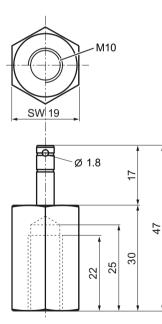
Dimension drawing of quick change holder 6GT2690-0AH10
